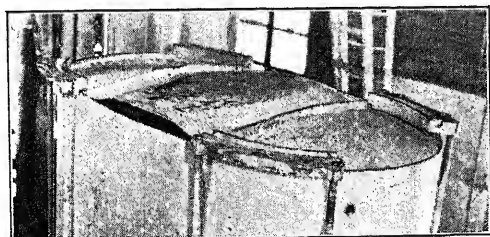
MIDDLE TANK OF 136 B AFTER TEST No. 31 SHOWING ACTUAL OPENING WHERE WELDED SEAM FAILED
